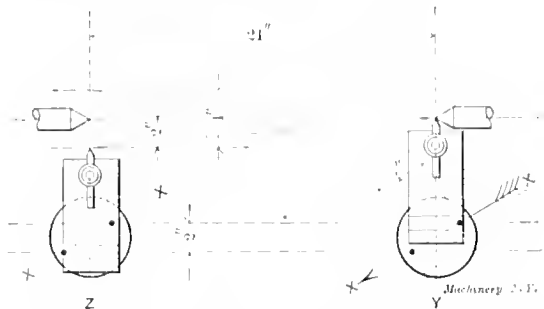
Diagram illustrating the Principle of the Taper Attachment.
